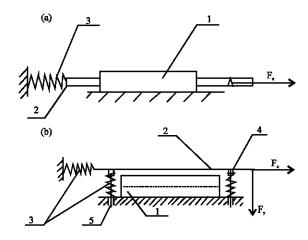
Kinematic schemes of oscillating drives with a cylindrical: a) Flat and b) Linear electric engines with spring storages for mechanical energy in different planes: 1) Stator; 2) Rotor; 3) Spring elements; 4) Roller and 5) Rod
